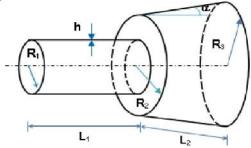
Geometry of a tube composed by cylinder, annular plate and cone
